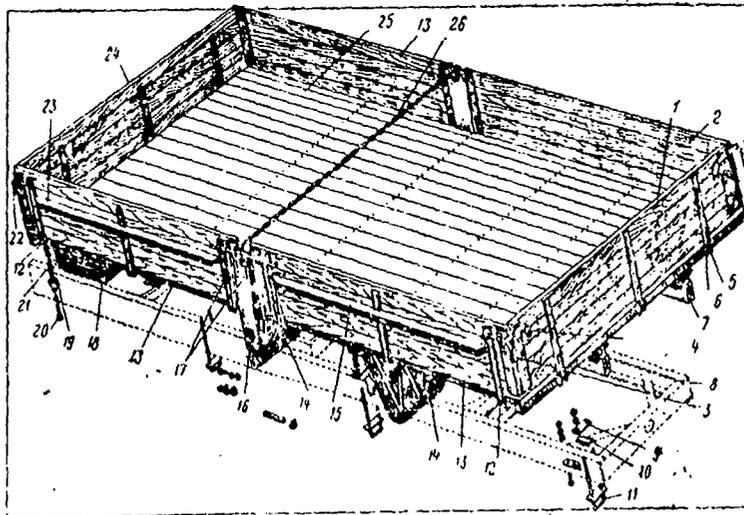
Platform of ZIL-130G: 1, rear wall; 2 and 13, side walls; 3, 17 and 22, lock bolts; 4, lock hook; 5 and 12, lower loops; 6, support pin; 7, longitudinal beam; 8, frame; 9, cover; 10, clamp; 11, stirrup; 14, spray shields; 15 and 23, supplementary beams; 16, side uprights; 18, tool box; 19, bracket; 20, bracket bolt; 21, spring; 24, front wall; 25, platform base; 26, upright support chain
